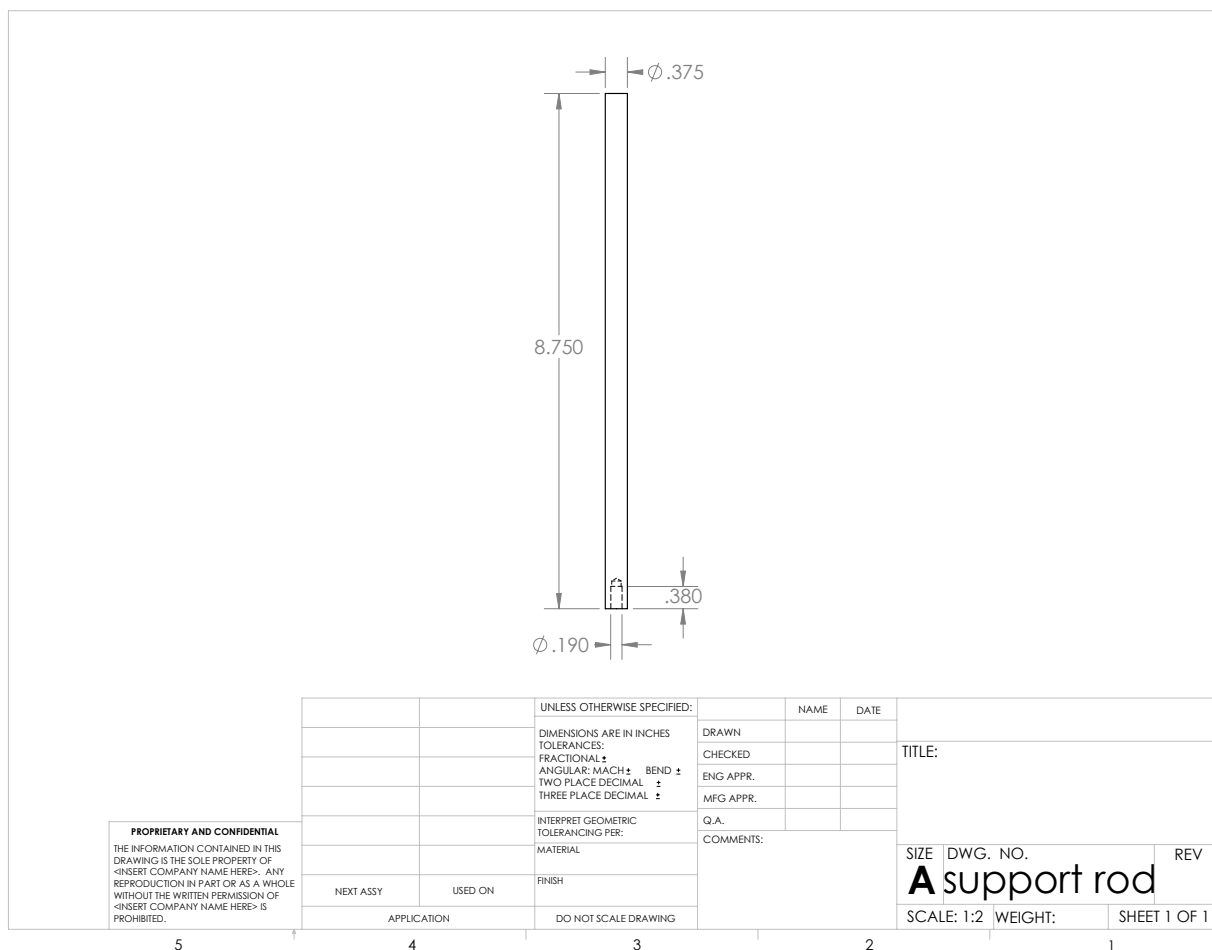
The drawing of the FR4 fiberglass mounting rods (3 pcs). Dimensions are mixed in inches.
